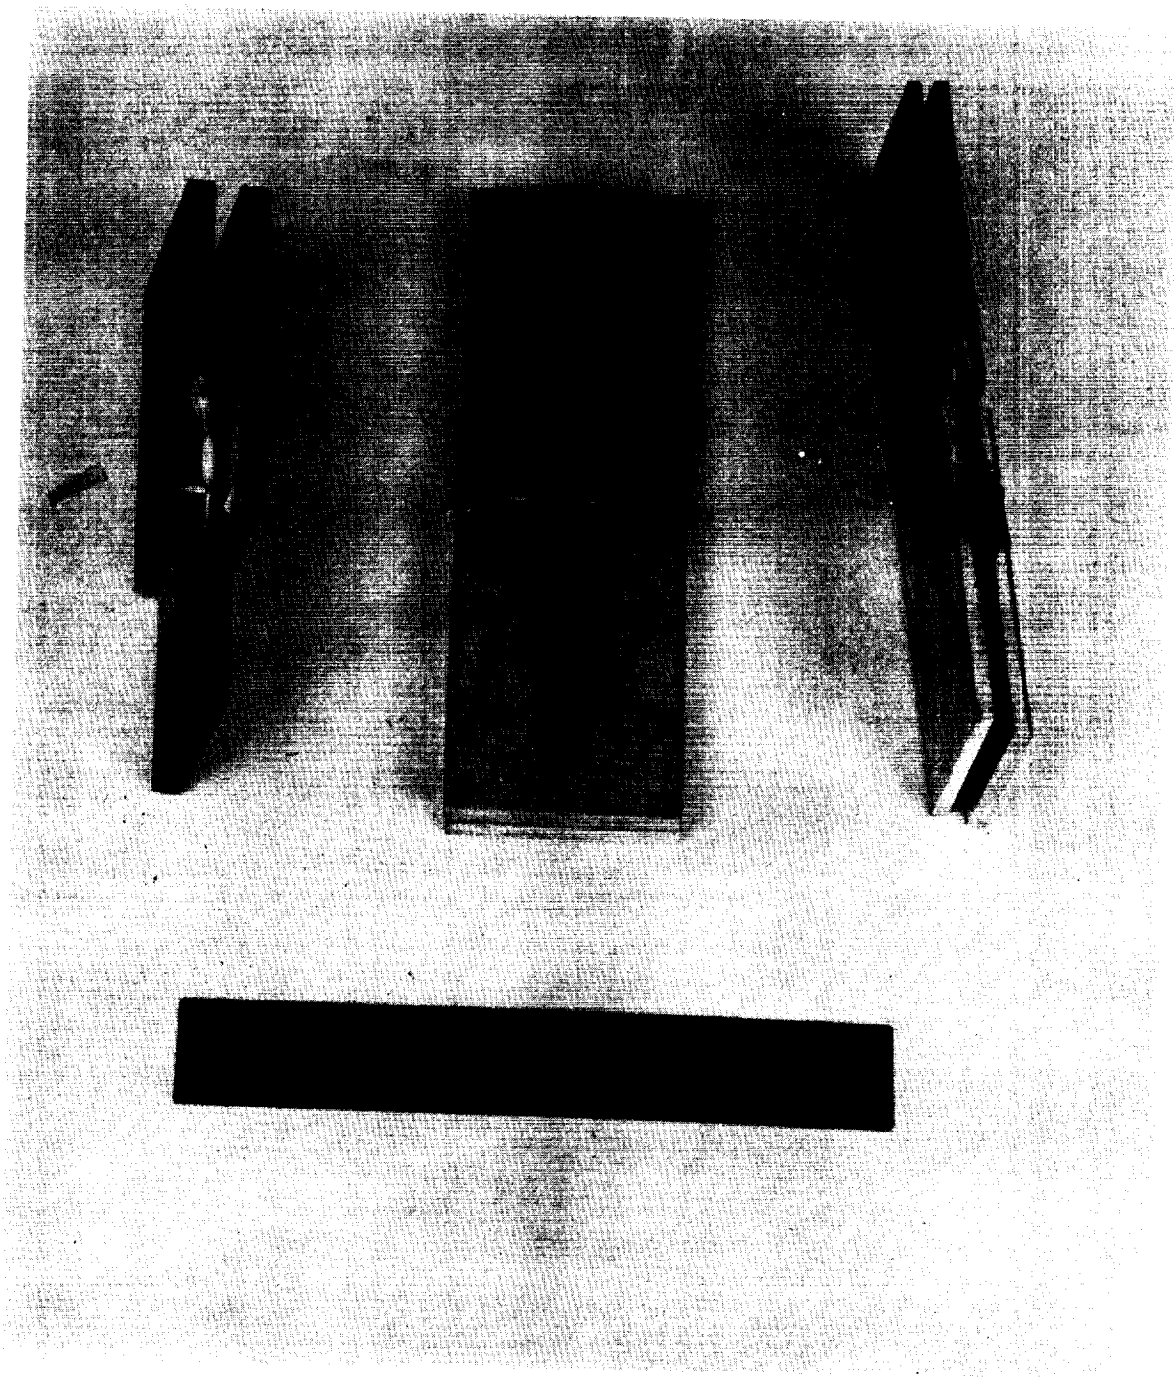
REINFORCED 0.060-INCH TEST SPECIMENS WITH AN UNREINFORCED 0.120-INCH TEST SPECIMEN
